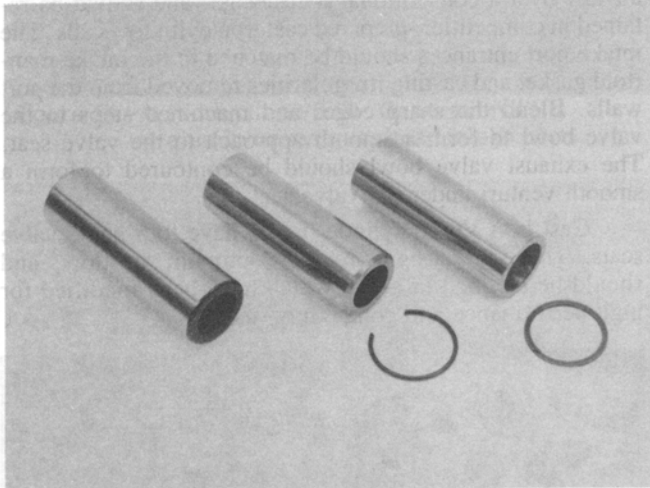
V6/60 piston pins: pressed fit production wrist pin (left); Chevrolet heavy-duty pin with round wire retainers (center); aftermarket tool steel wrist pin with Spirolox retainer (right).
